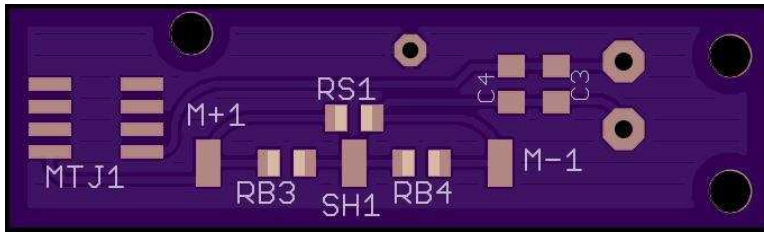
Axial field sensing circuit. Board layout for two axis probe design.
